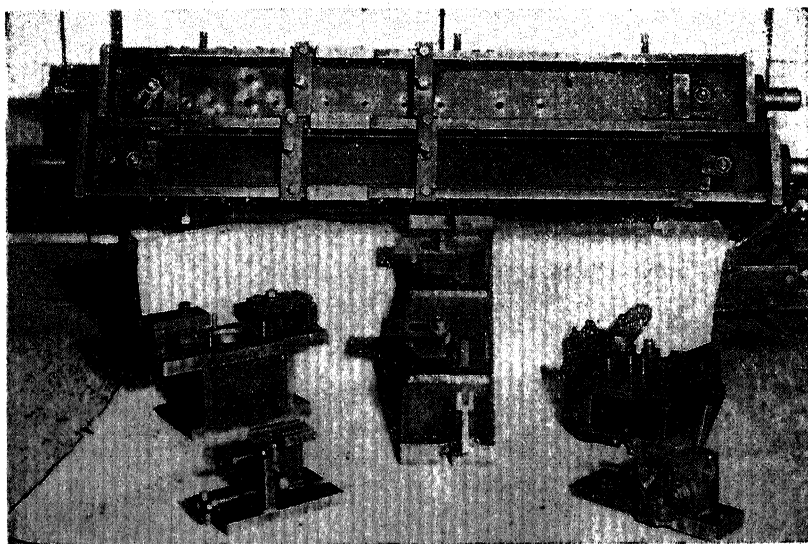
Welded steel fixtures used for cutting keyways in shafts. Welding saves 75% in cost, the top two fixtures being welded at savings of \$28.00.
